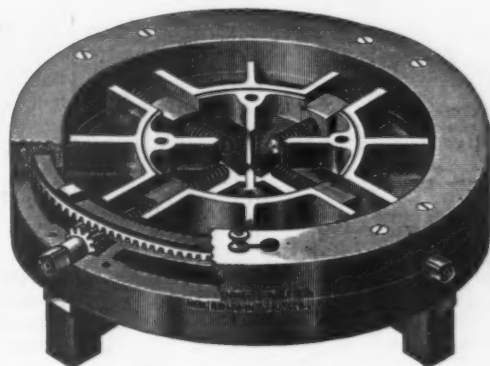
View Showing Annular Gear Thrown Out of Mesh with Pinion.
